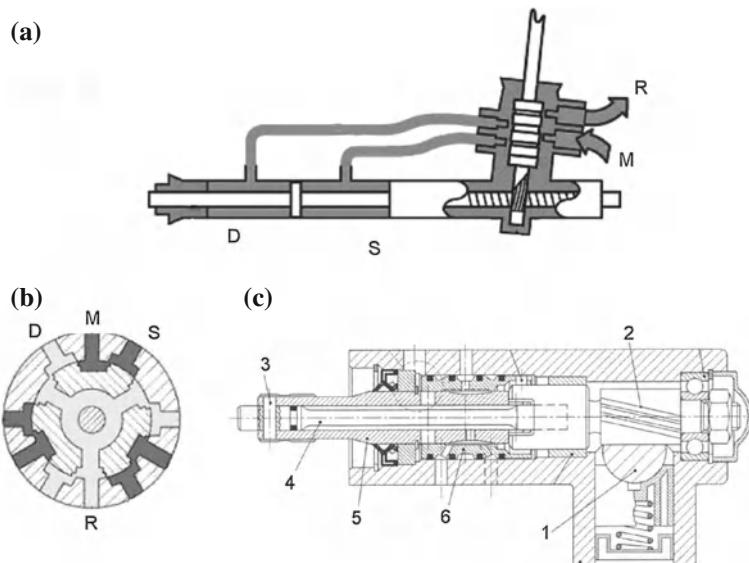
Sketch of a hydraulically assisted rack and pinion steering box a detail of the hydraulic control valve b, c (from Genta and Morello 2009)
